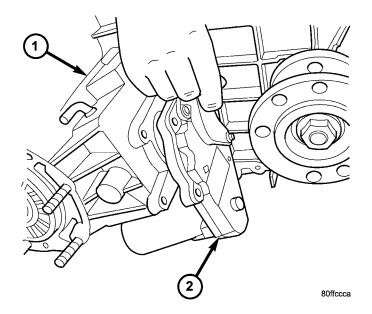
Install Shift Motor Assembly Onto Transfer Case
